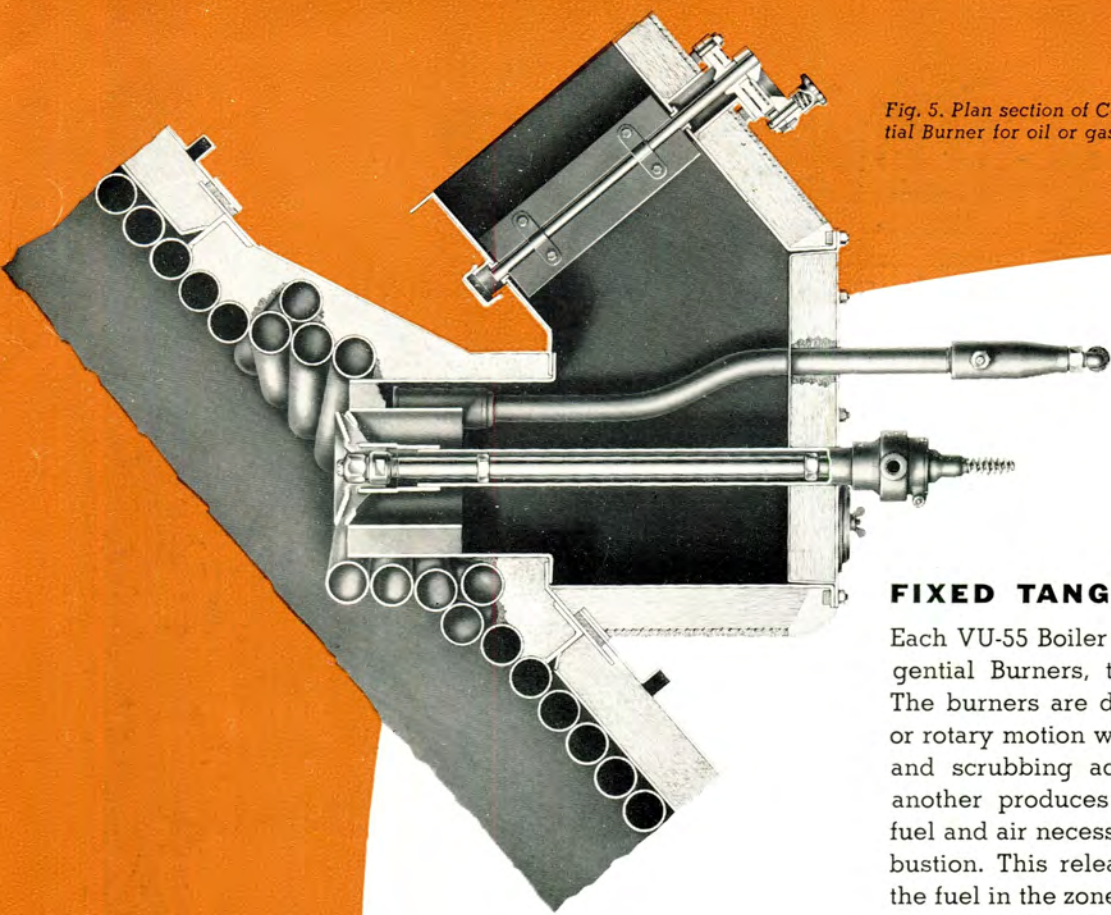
Plan section of C-E Tangential Burner for oil or gas.
